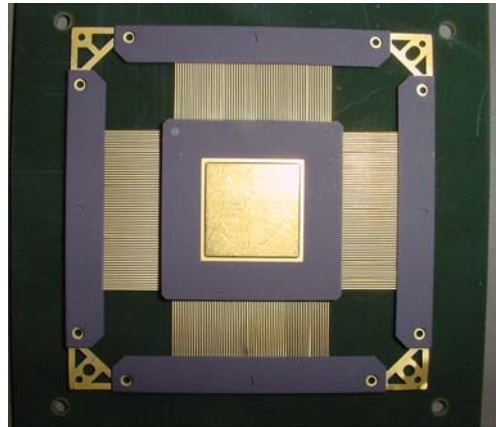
• CQ Package without Heat Sink – Bottom View
